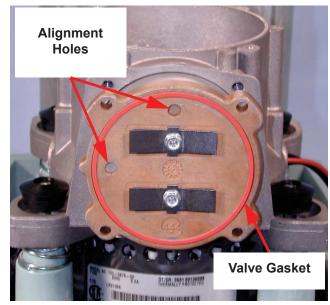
FIGURE Q: VALVE GASKET & ALIGNMENT HOLES
